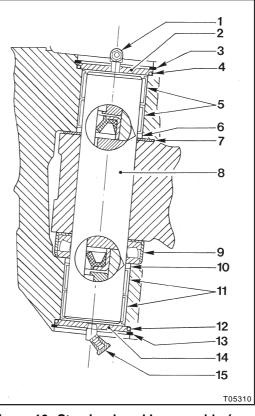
Steering knuckle assembly (non maintenance-free king-pin)
